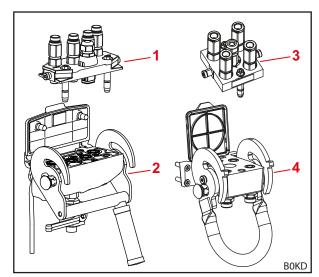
Layout - Hydro-Fix and Multi-coupler
